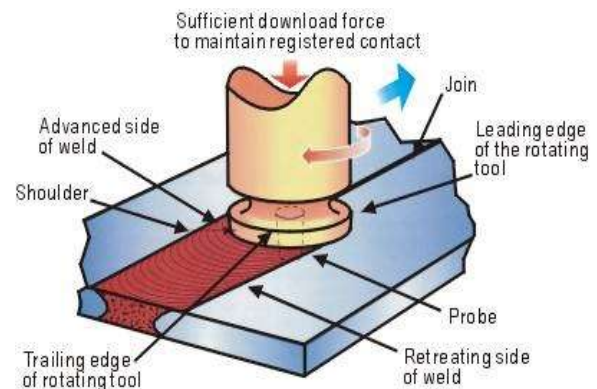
Schematic diagram of Friction Stir Welding
